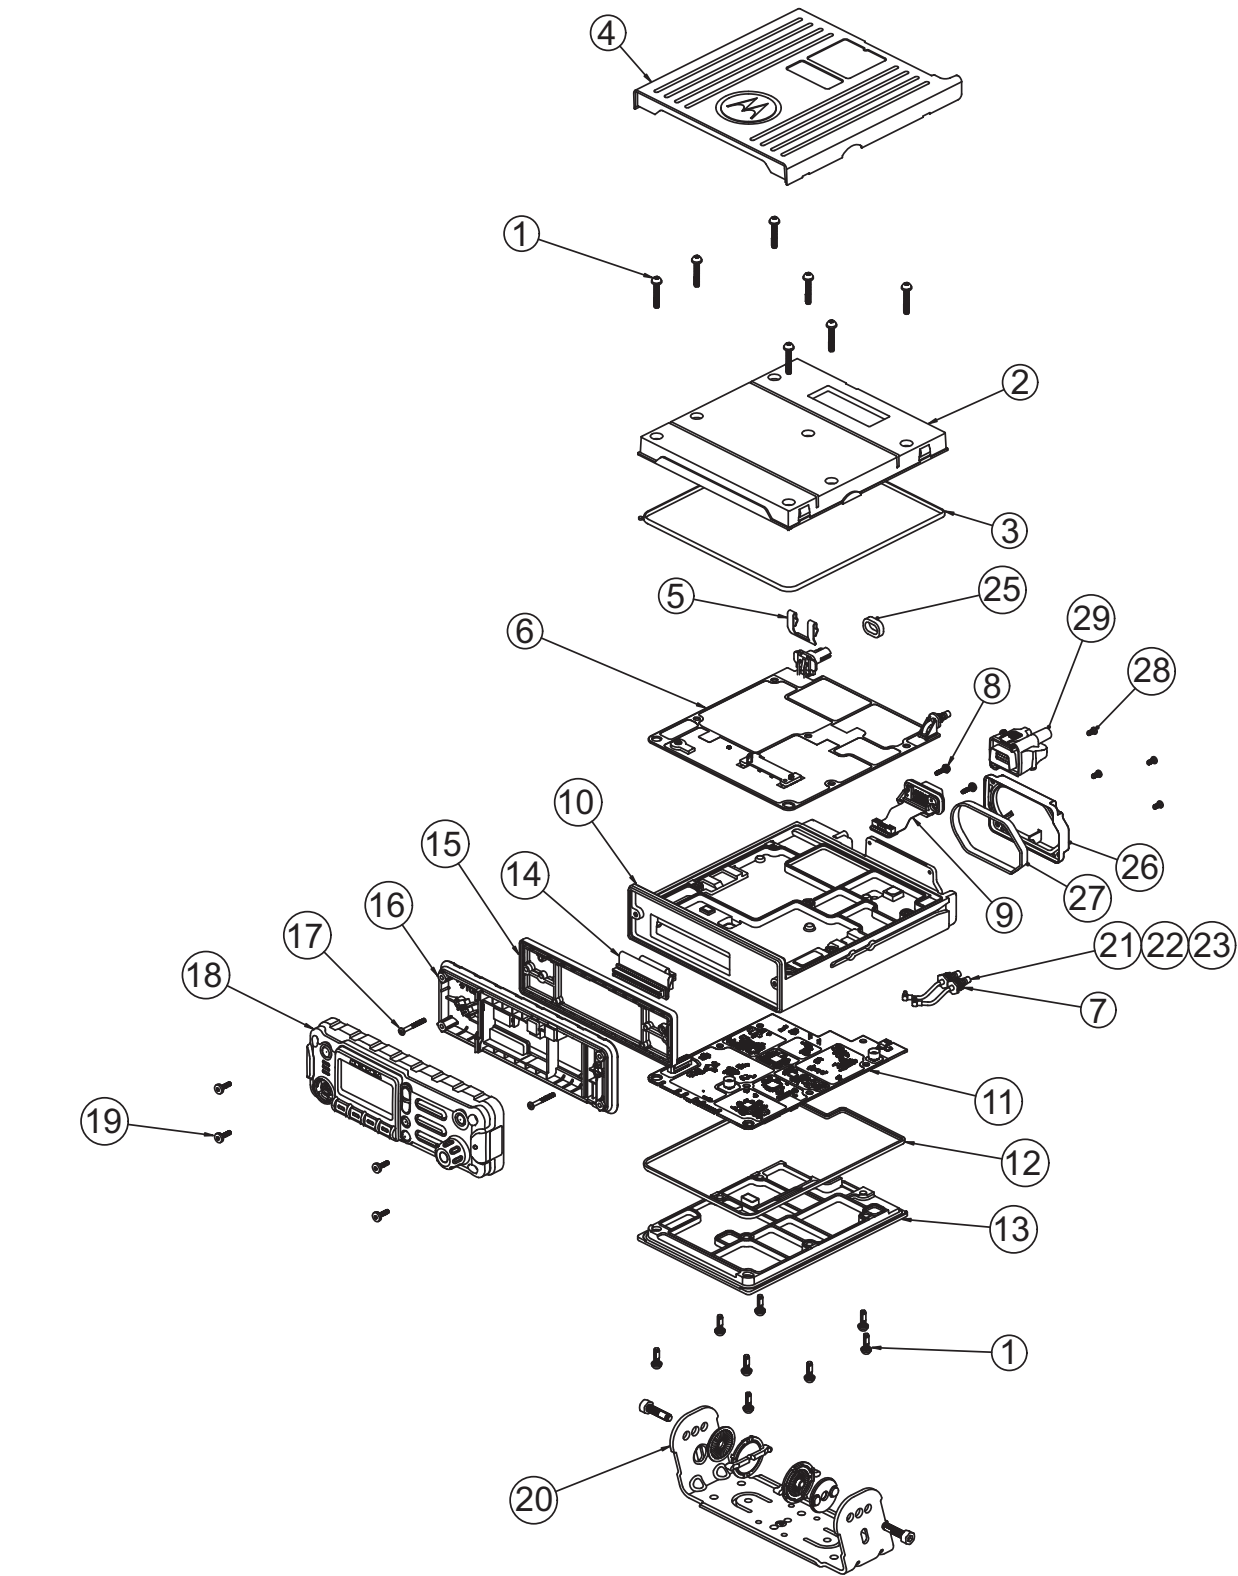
APX 8500 O2 Dash Mount Radio Exploded View
